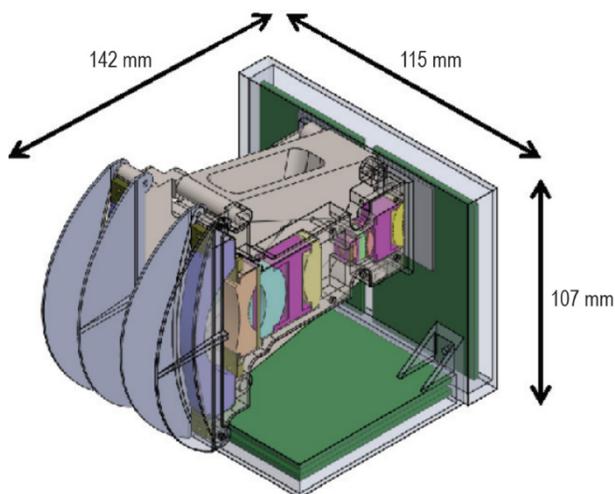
CAD rendering of the MAVRIC dual camera assembly.
